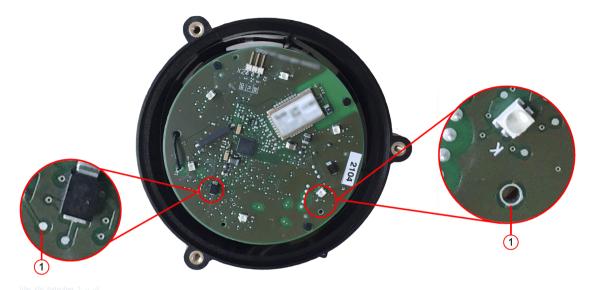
PCBA Terminal Location to Check Battery Voltage
